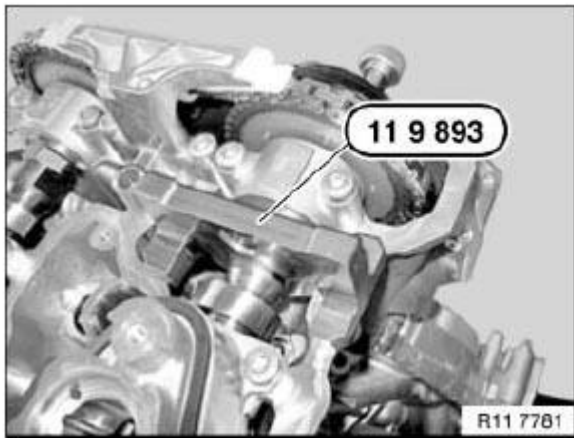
Identifying Special Tool 11 9 893 On Exhaust Camshaft
